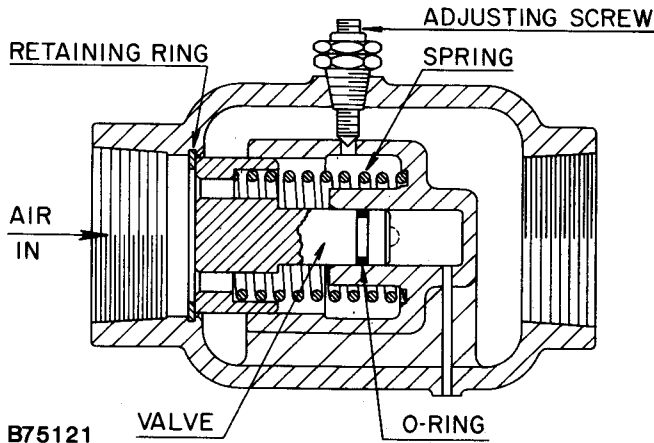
MINIMUM DISCHARGE PRESSURE VALVE
